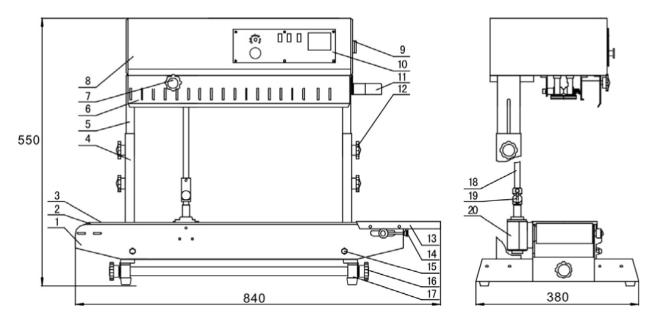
Vertical Band Sealer (1) Conveyor Table, (2) Driving Roller, (3) Conveyor Belt, (4) Fixed Bracket, (5) Slip Bracket, (6) Safety Cover, (7) Adjusting Knob for Embossing Roller, (8) Housing, (9) Circuit Breaker, (10) Control Panel, (11) Feed Opening, (12) Fastening Knob, (13) Worktable, (14) Adjusting Knob for Conveyor Belt, (15) Tightening Nut, (16) Transverse Tightening Knob for Conveyor Table, (17) Conveyor Support, (18) Vertical Shaft, (19) Gimbel Assembly, (20) Umbrella Gear Shaft
